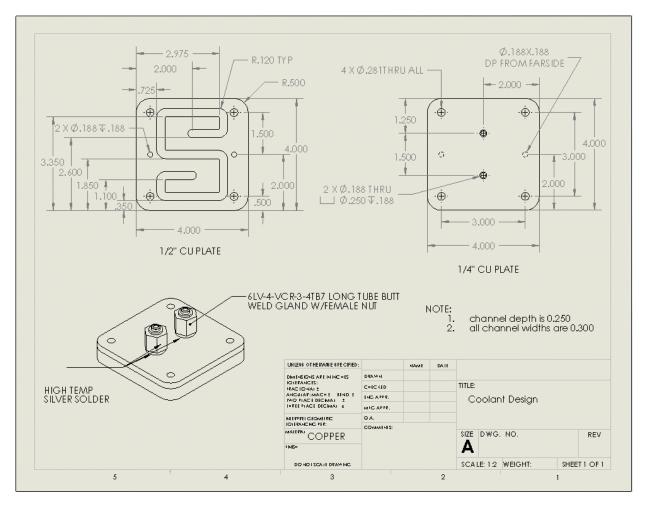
Cooling plate drawings for machine shop. Produced with Solidworks.
